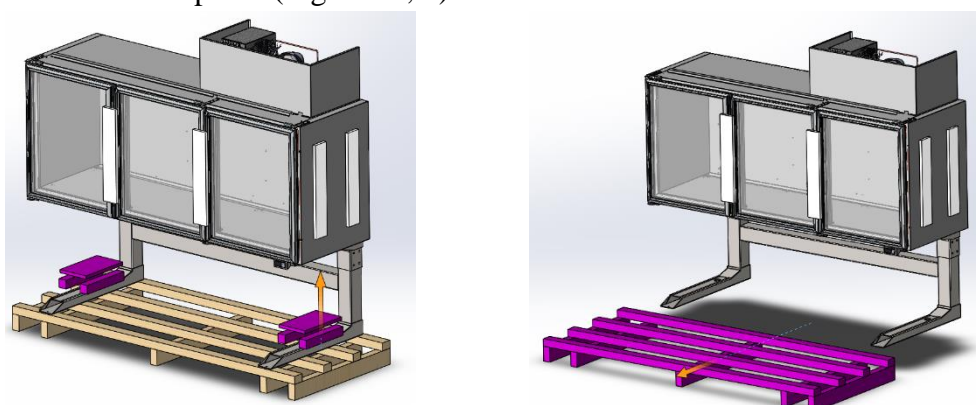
a) location of fastening elements; b) pallet.
